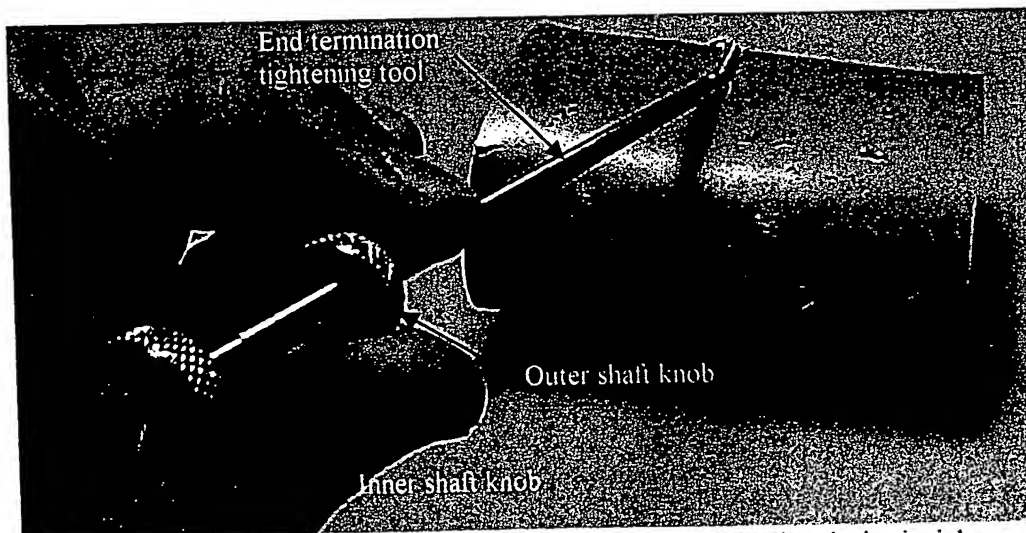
The tension of the tetherline is adjusted and the termination device is tightened by holding the outer shaft knob steady, while turning the inner shaft knob clockwise.
